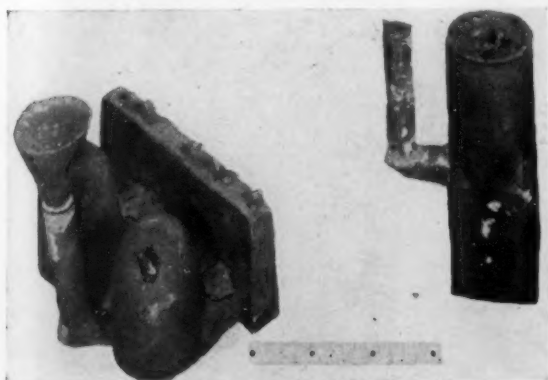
ABOVE—TEST CASTINGS AS REMOVED FROM MOLDS.
